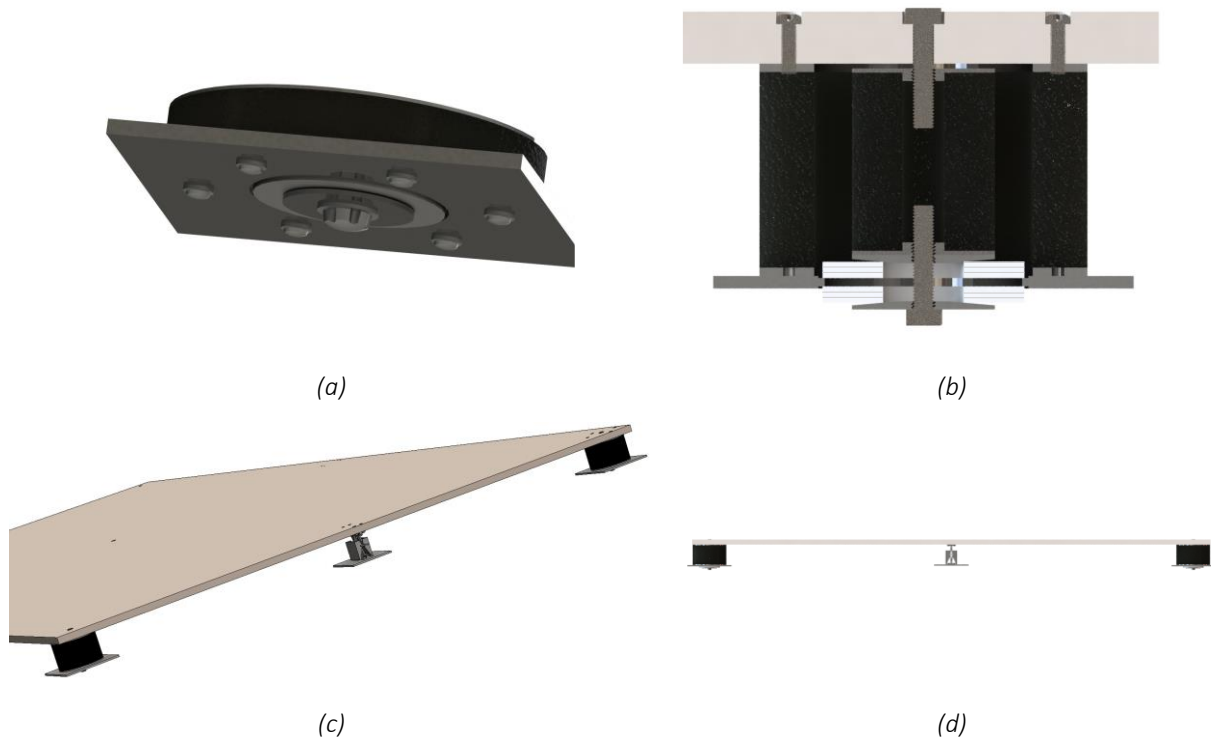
Indicative realization of the mounted panel. (a) KDamper mounts with Belleville springs. (b) section view. (c) Indicative configuration of the mounts. (d) Indicative mounting of the panel.
